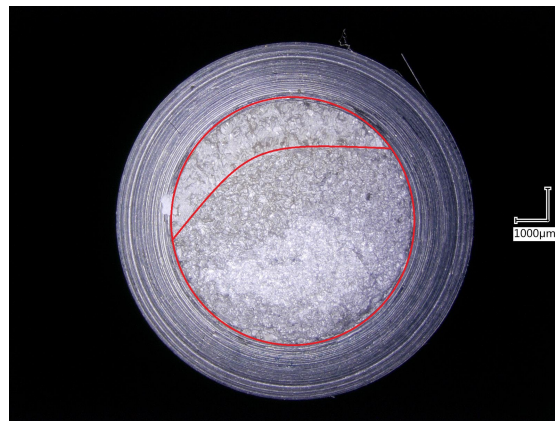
Eccentric crack due to RB pre-fatiguing
